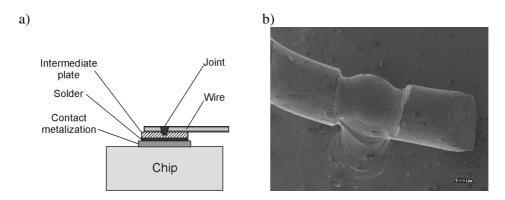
Laser bonding: a) schematic diagram of laser connection, b) picture of laser welded connection
